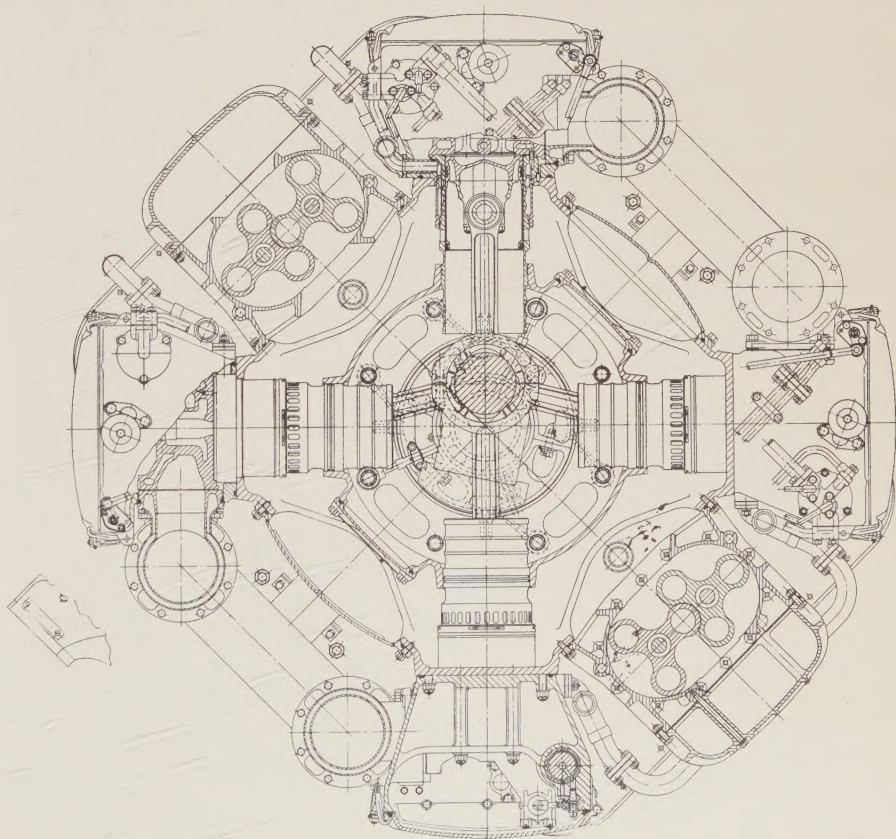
Engine cross section showing one row of pistons, connecting rods, and cylinders, Roots-type blowers, and exhaust manifolds.
